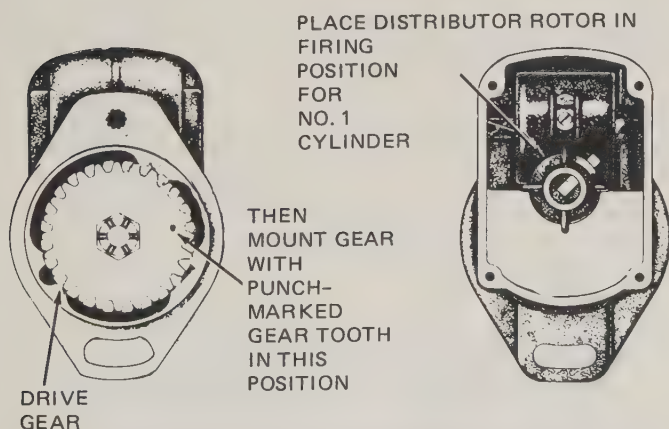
The marking and position of the drive gear on the magneto rotor shaft. (Wisconsin Motor Corporation)
